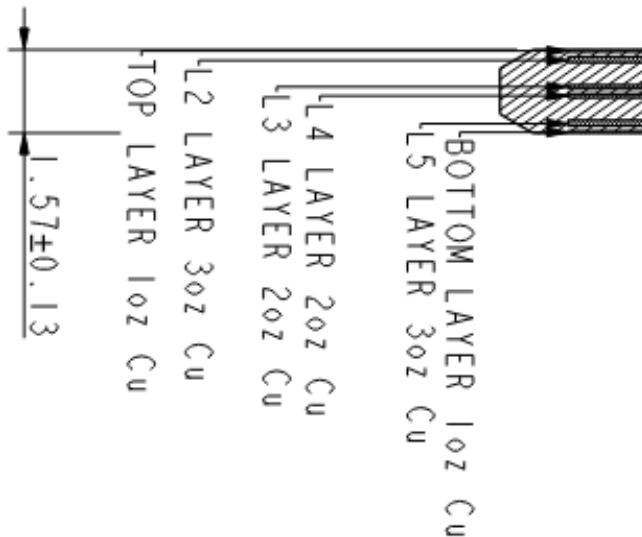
An Example of PMM Module Current Rating Test Board PCB Layer Stack
